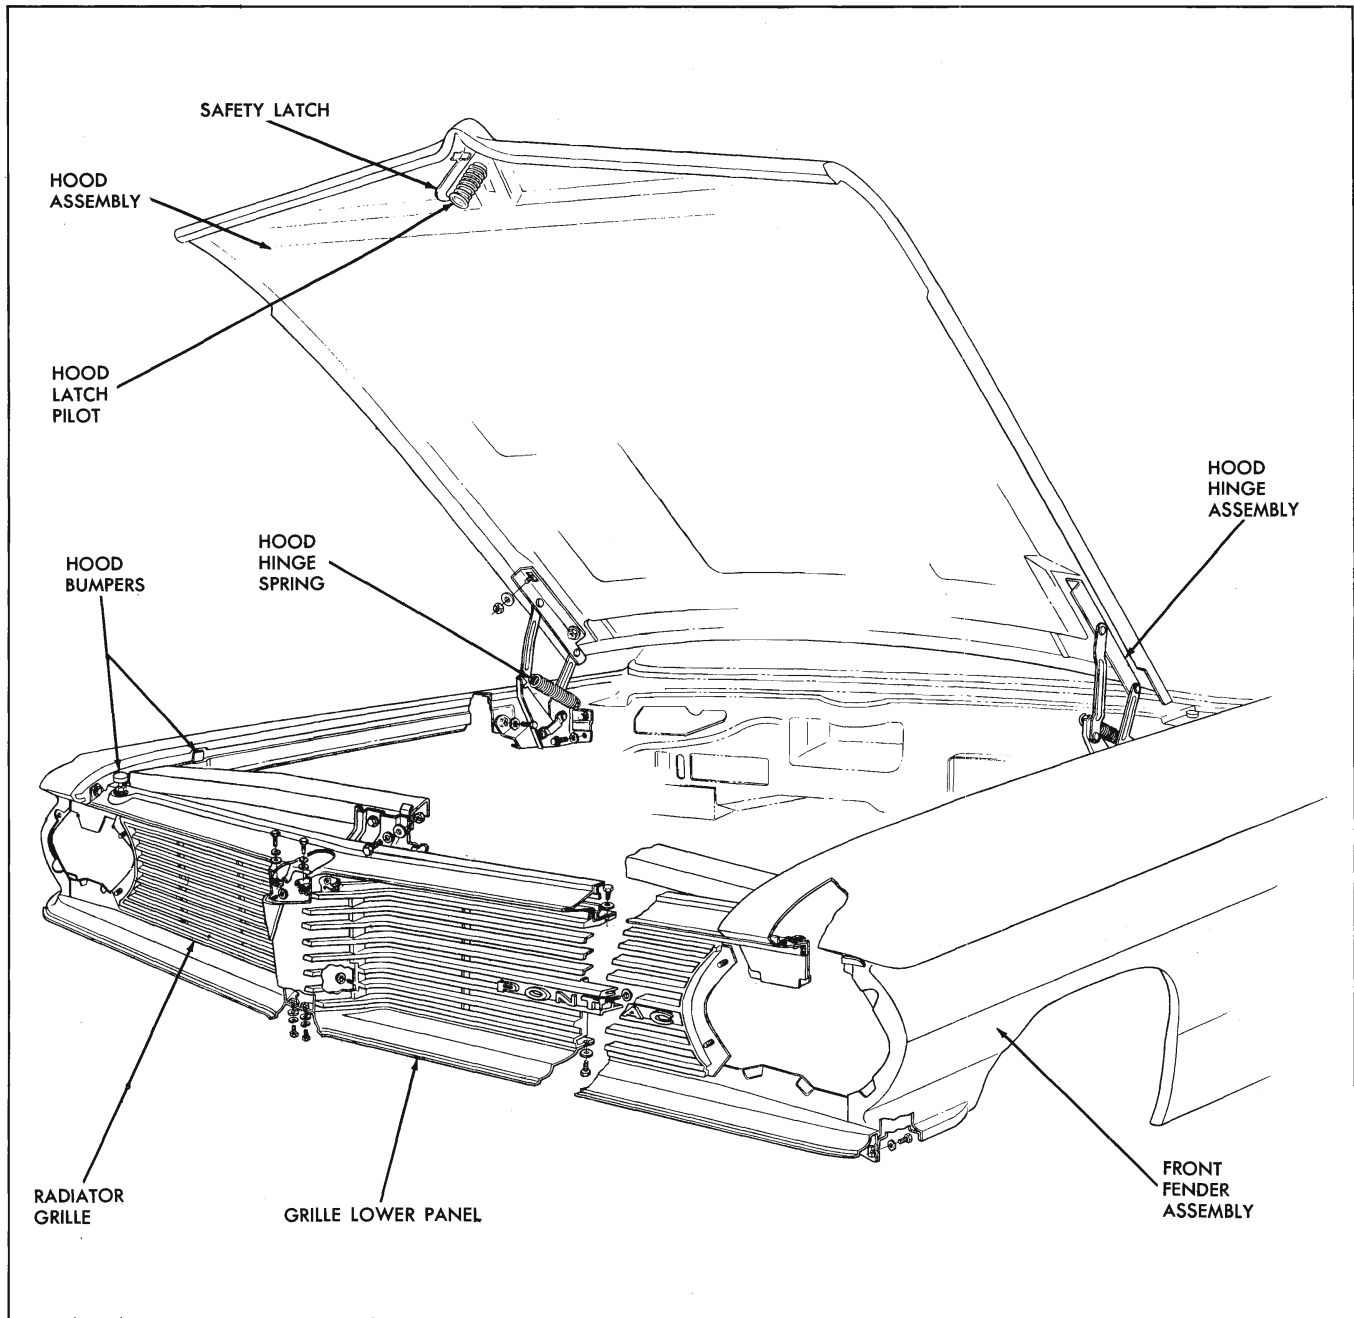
Sheet Metal Parts—Hood and Grille Installation Details
